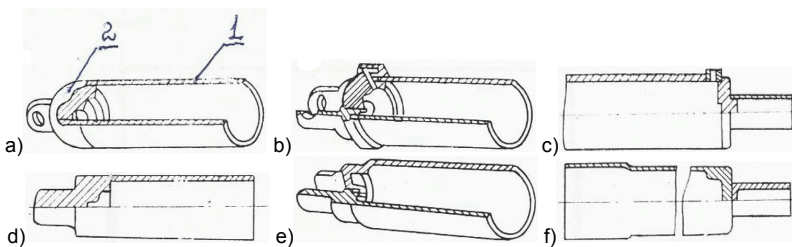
Designs of hydraulic cylinders, manufactured through traditional (a, b, c) and extrusion (d, e, f) techniques
